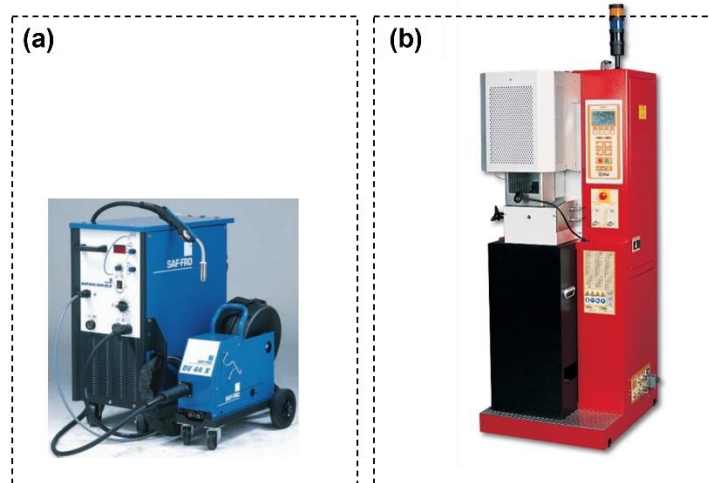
(a) Welding Machine<sup>24</sup>; (b) Industrial induction oven, 30 kHz - 24kW,
